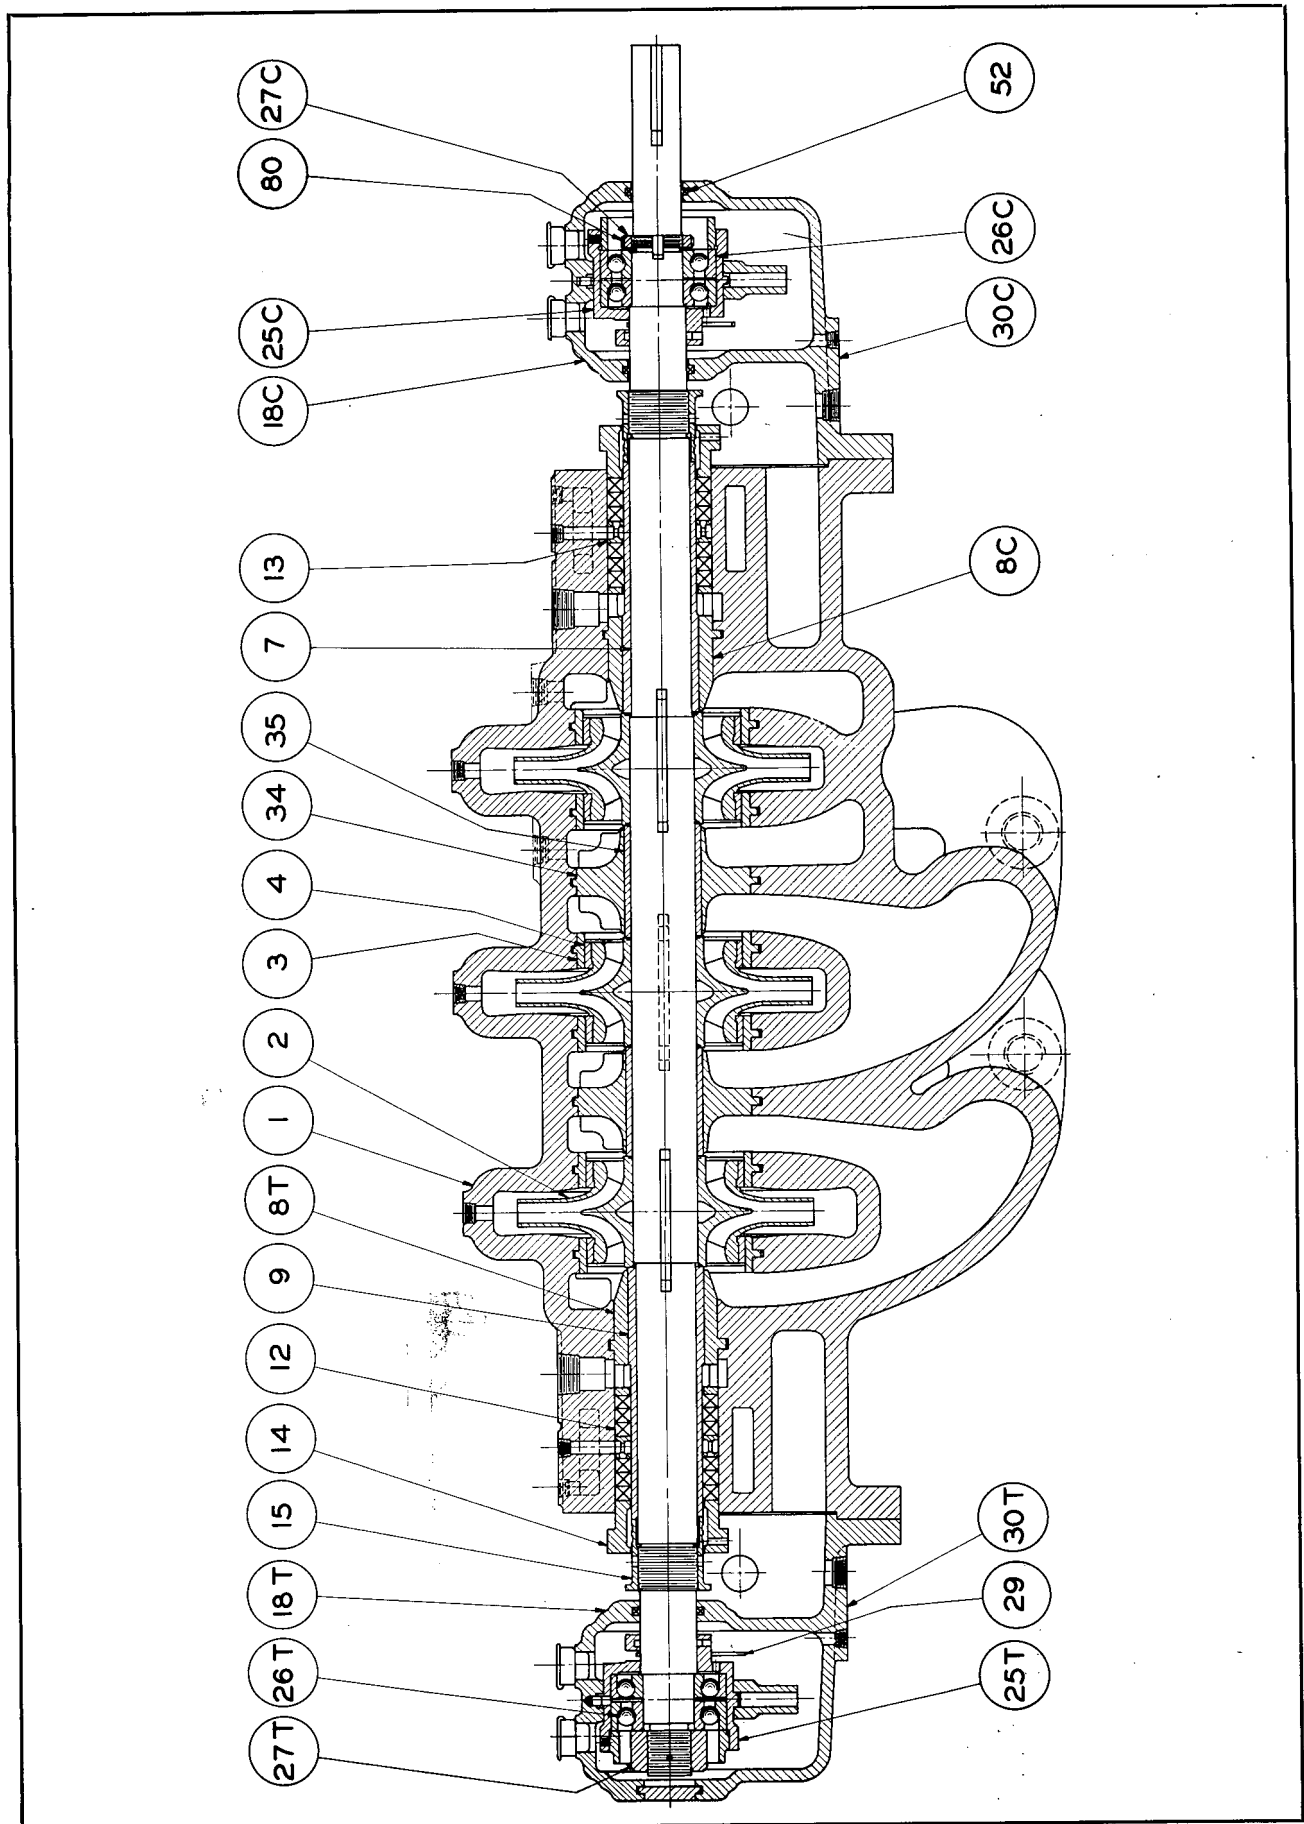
Type M Pump with Oil Lubricated Bearings.
